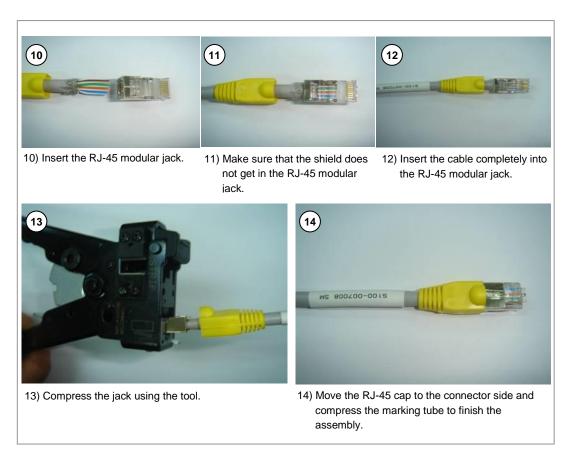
Assembling the RJ-45 Connector (Shield Type) (2)
